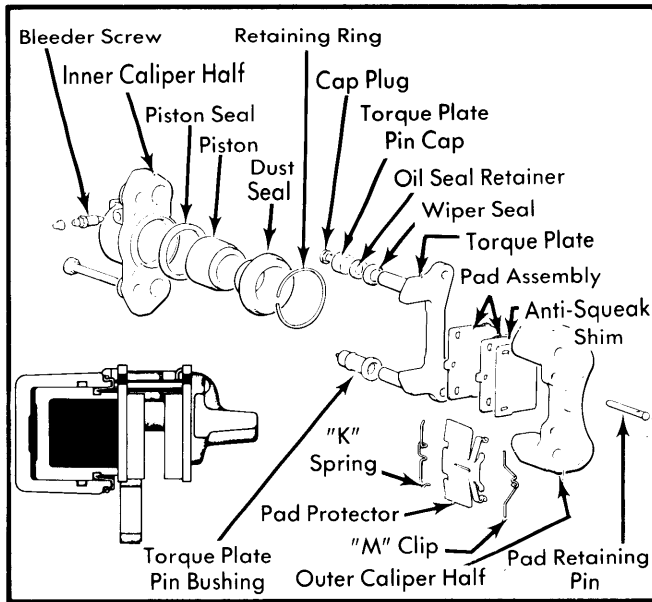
Disassembled View of Disc Brake Caliper (Champ & Colt)
